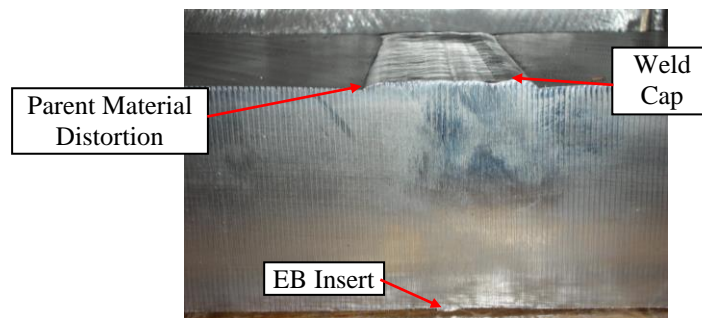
Photograph of the weld cross-section from the flat plate welded test-pieces.
